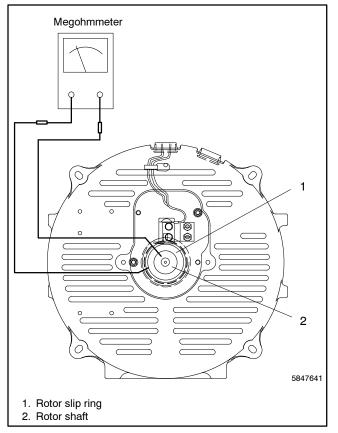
Performing Megohmmeter Test on Rotor (10/12RY Shown)
